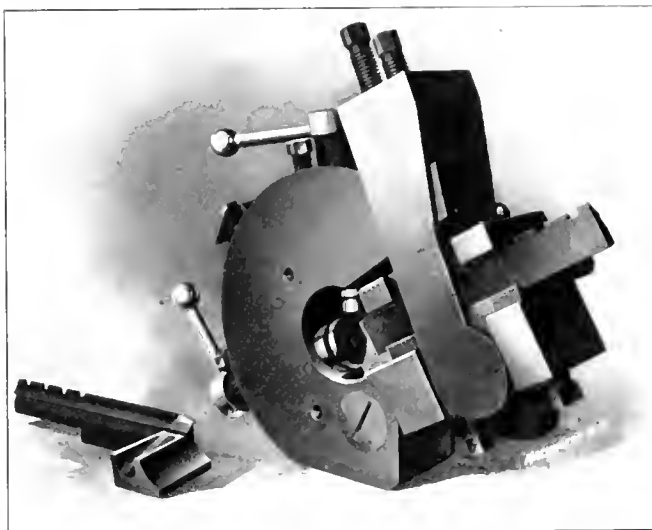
The No-clearance Turning Tool for the Flat Turret Lathe.
